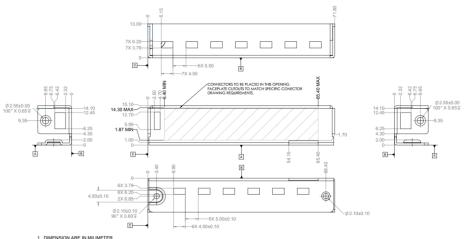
Small Card Generic I/O Faceplate with Pulltab Version (2D View)
